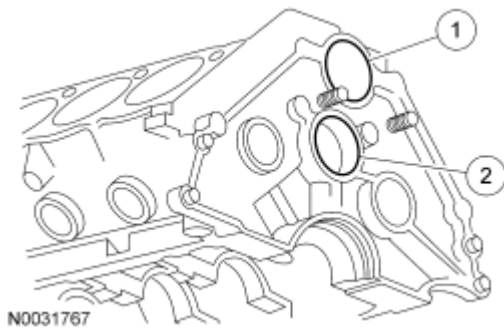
Identifying Engine Dynamic Balance Shaft Bearing Cover & Camshaft Bearing Cover
